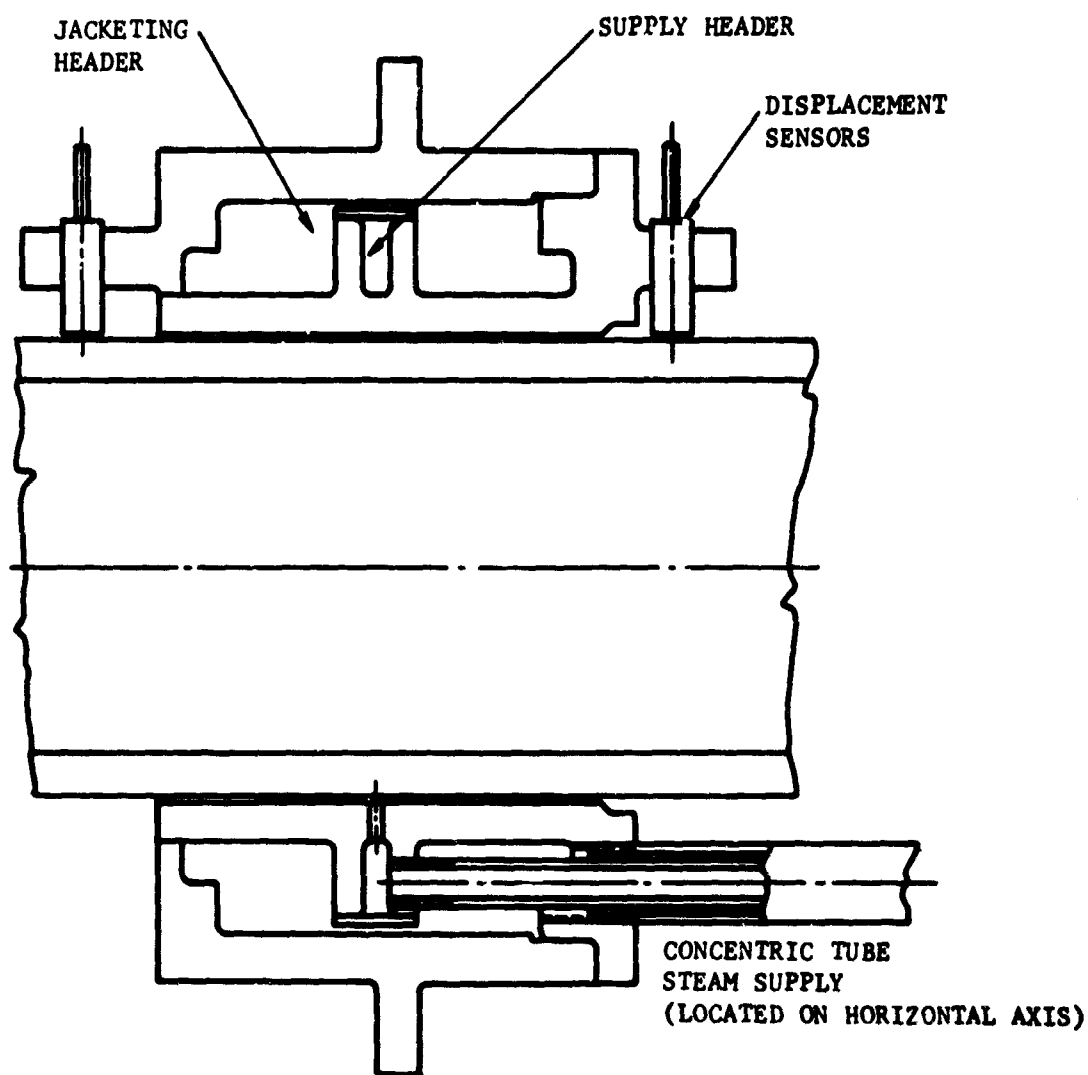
Cross Sectional View of Dual-Manifold Steam Bearing
